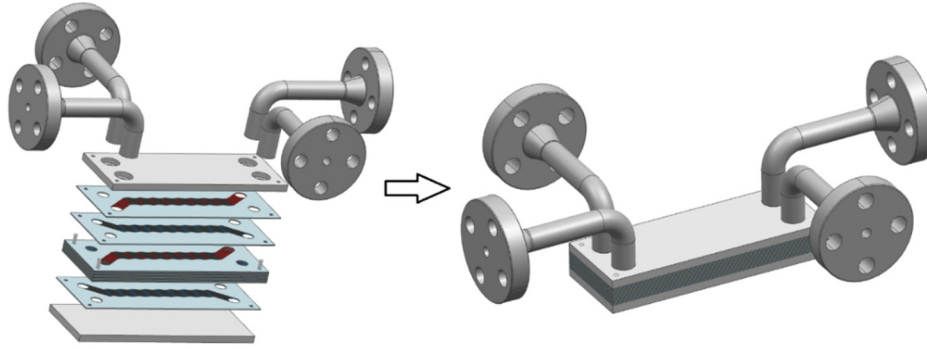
An exploded view and a schematic of the fabricated PCHE.
